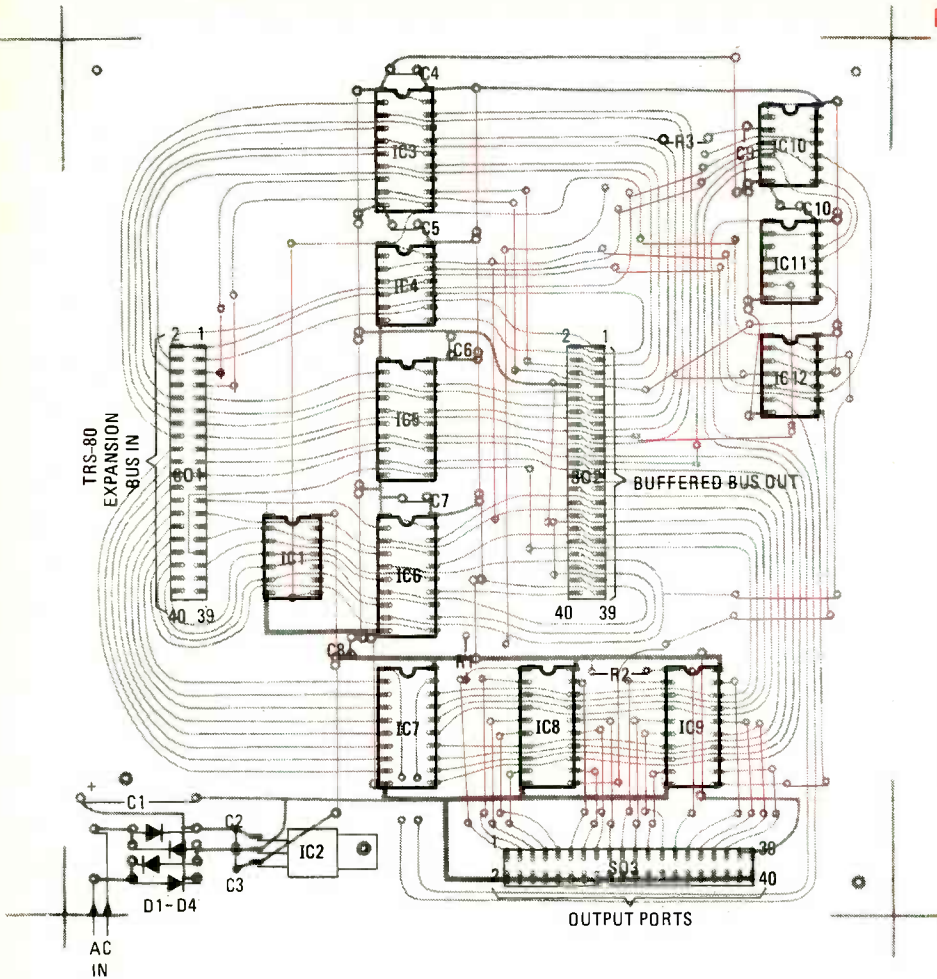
EXTENSIVE USE OF JUMPERS makes single-sided design possible. They should be the first parts installed. One-ampere, 8 to 12-volt transformer is required.
